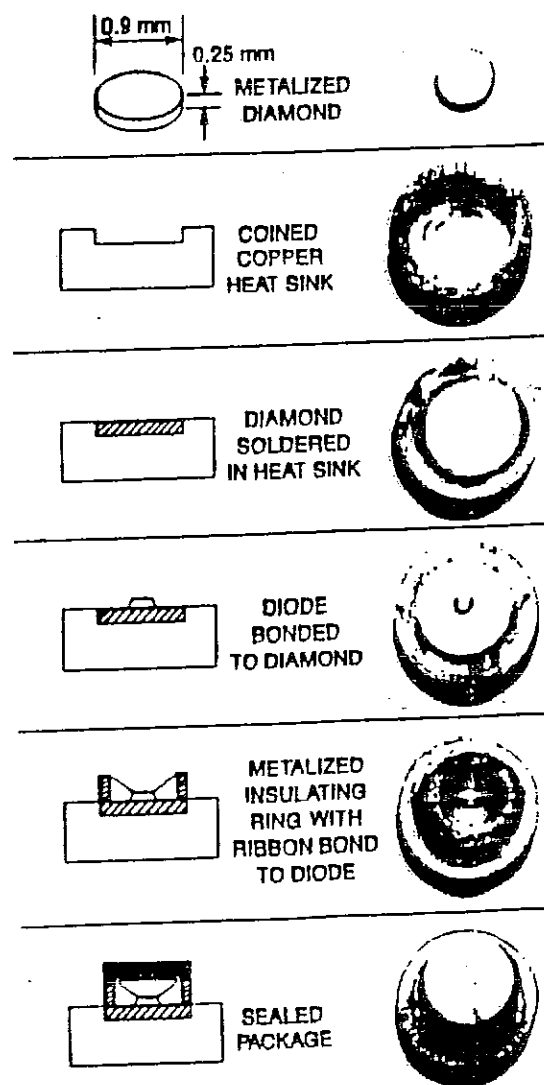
Assembly and proper packaging of millimeter-wave diodes.
